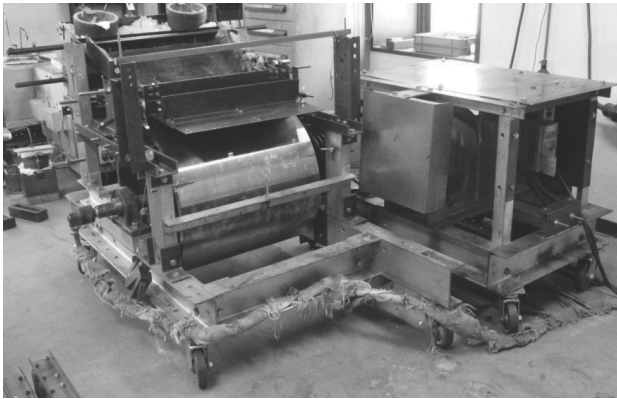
Photograph of single roll caster equipped with a scraper which can cast 600 mm width strip. Size of the roll; diameter: 600 mm, width: 600 mm
